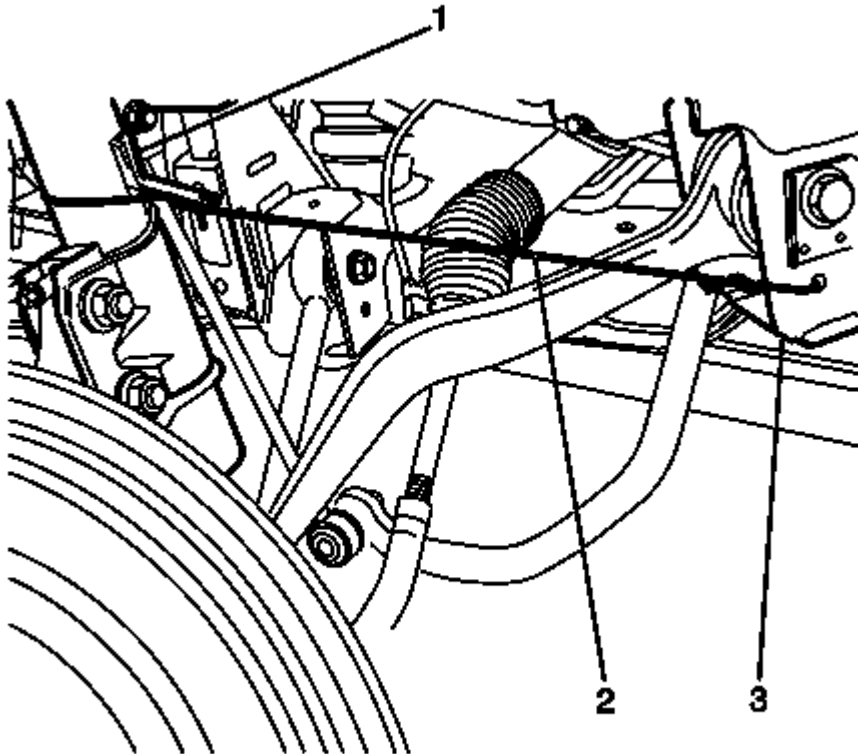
View Of Subframe, Heavy Mechanic's Wire & Strut Assembly
